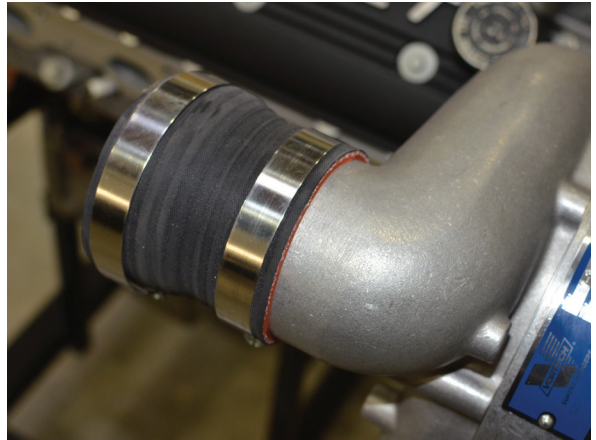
a: Install 3.00"-2.75" Reducer Sleeve
